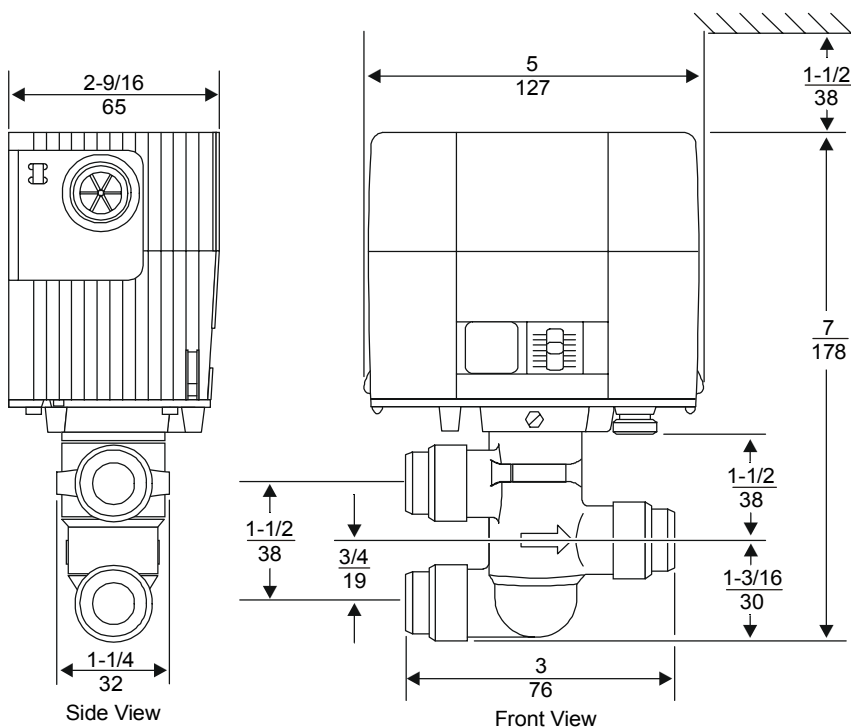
AV-8020 Three-Way Mixing Valve Dimensions, in. (mm)
